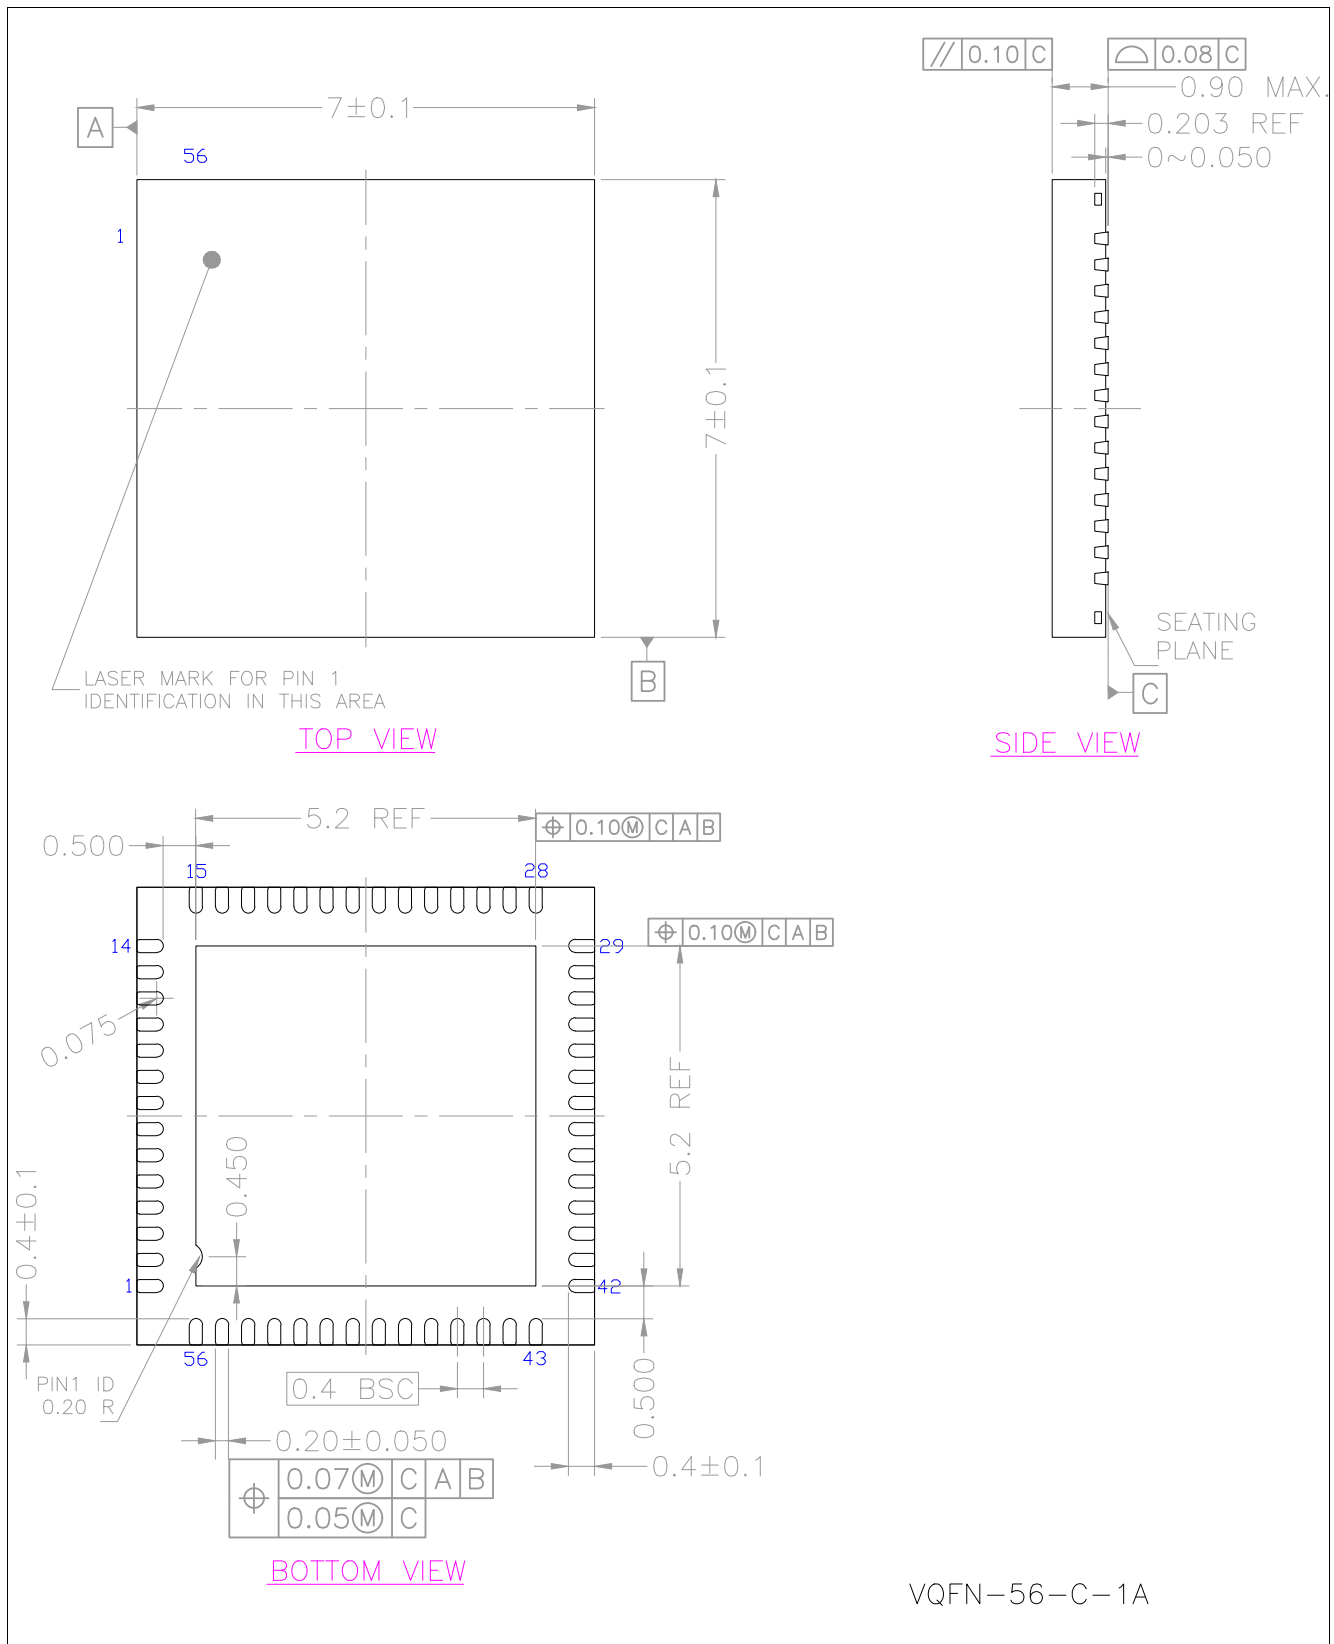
PG-VQFN-56 7 mm x 7 mm Package Outline
